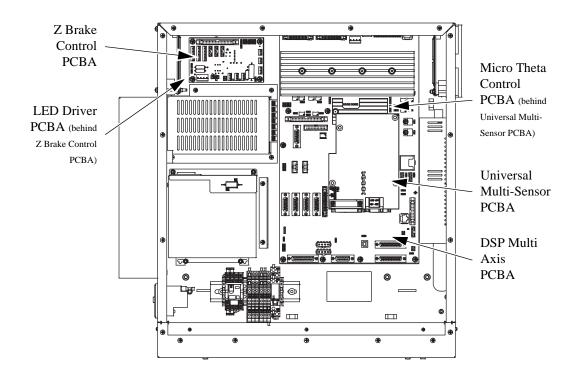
Location of Benchmark 450 PCBAs in Electronics Enclosure (Rear Panel Removed)
